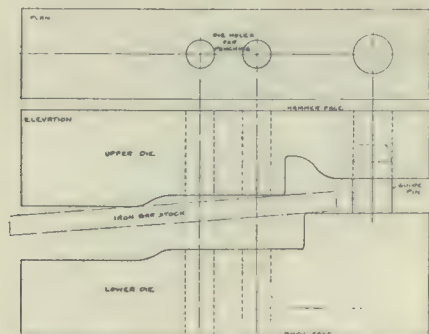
Forging the Ends of a Car Coupler Pocket.
